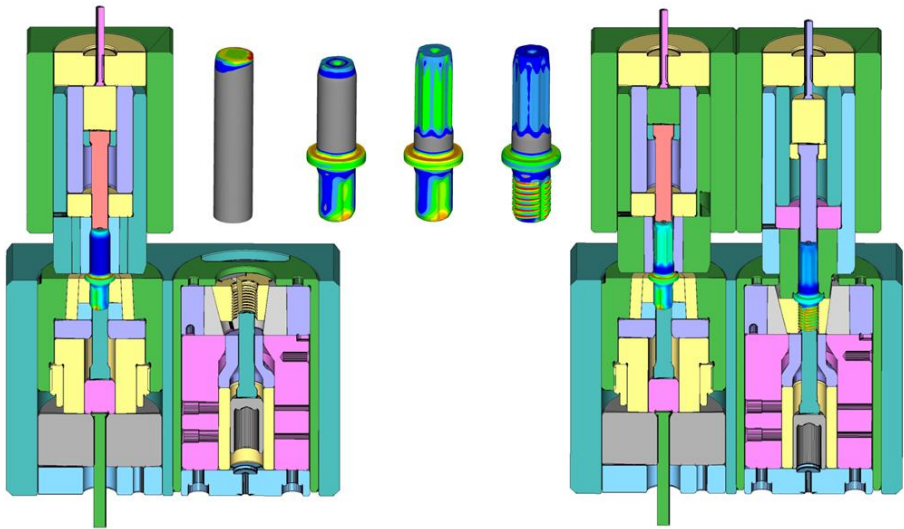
Entire tool assembly of a tool concept for thread embossing in a two die three stroke press
